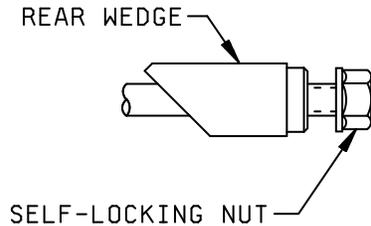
Screw retaining self-locking nut (corrosion resistant) details.
